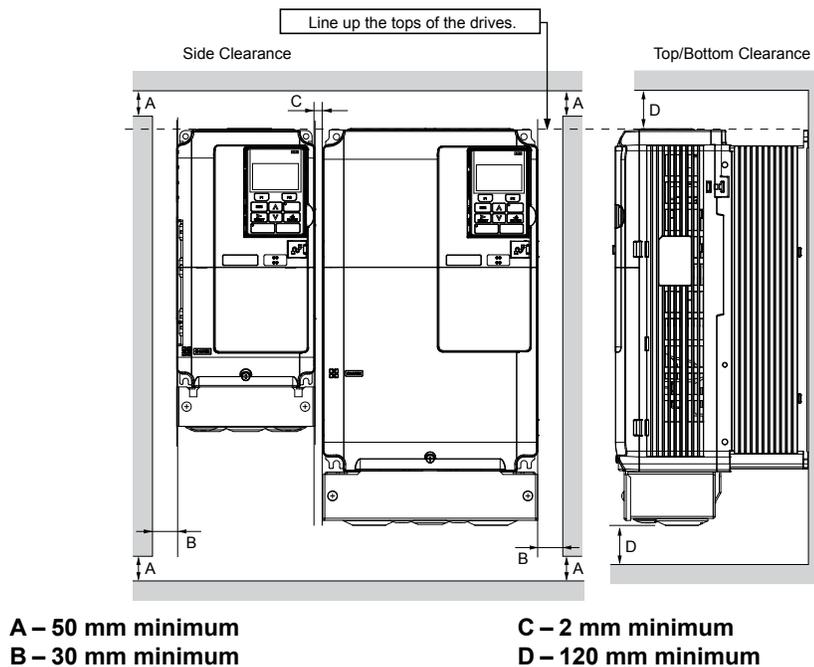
Space Between Drives (Side-by-Side Mounting)
